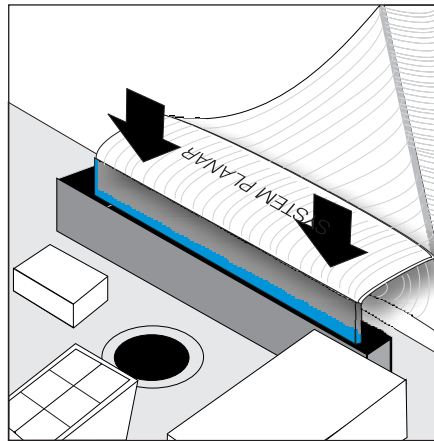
Installing the service controller cable into the SAN Volume Controller 2145-4F2 system board
